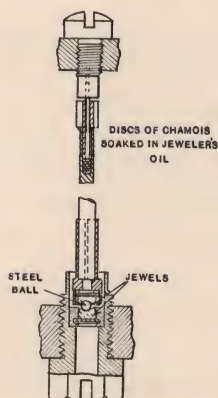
Bearing system used in Westinghouse meters showing ball and cup jewels.
